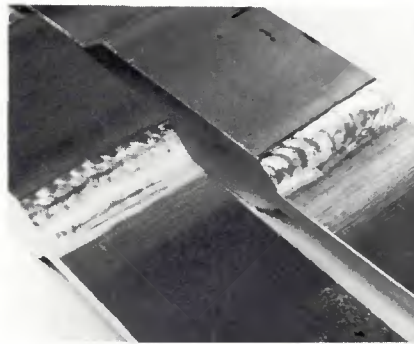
Appearance of GTA dressed and undressed (GMA welded) fillet welds
